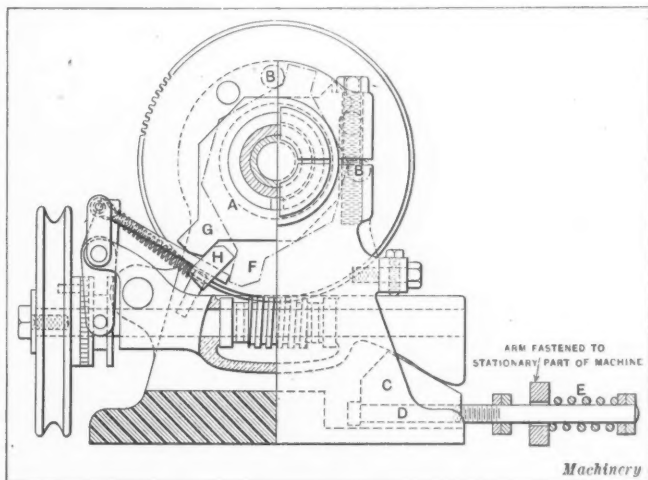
Mechanism of American Ammunition Co.'s Thread Miller, showing Principle of Semi-automatic Operation
